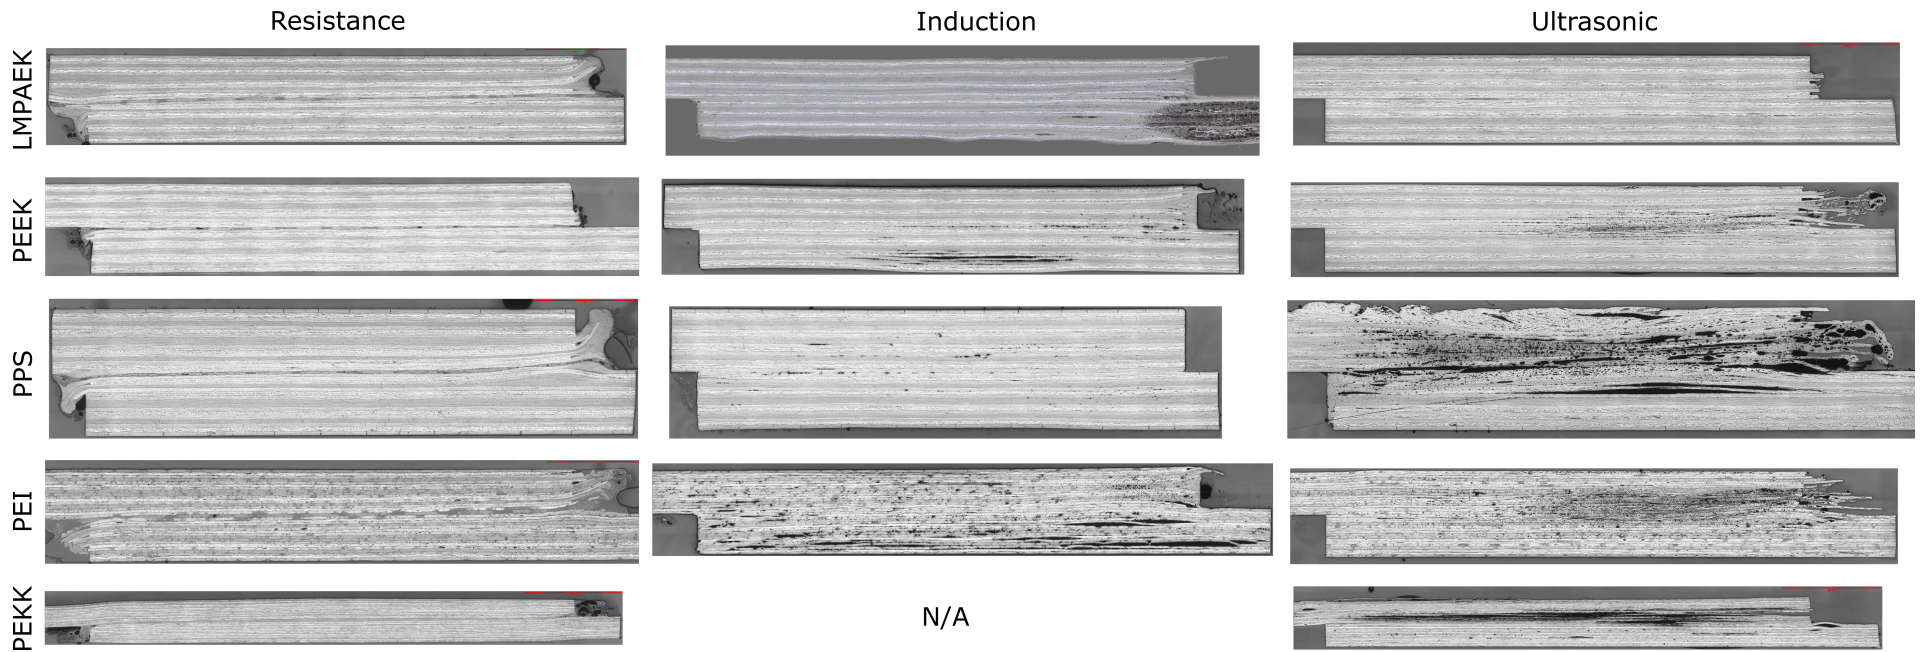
Representative photomicrographs of SLS welds taken at mid-width of the specimen, showing observed weld defects including: porosity, fiber pushout, thinning, and delaminations.
